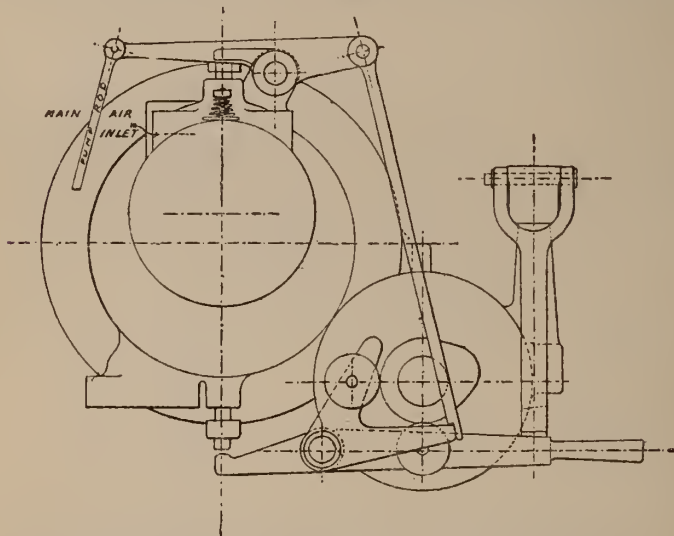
Elevation showing arrangement of valve levers and trip gear of Fielding & Platt's Oil Engine.
